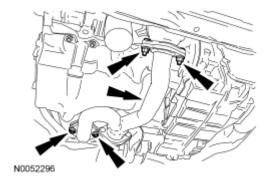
Locating Exhaust Flexible Pipe, Y-Pipe & Nuts Courtesy of FORD MOTOR CO.
